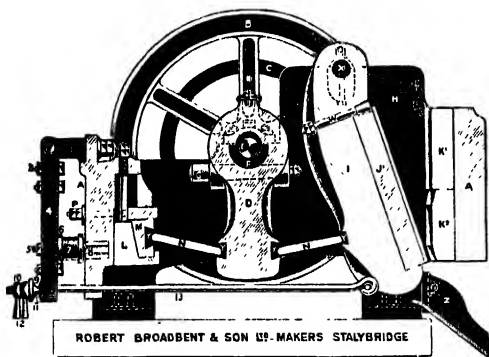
Section of Broadbent's Improved Blake Stonebreaker.
